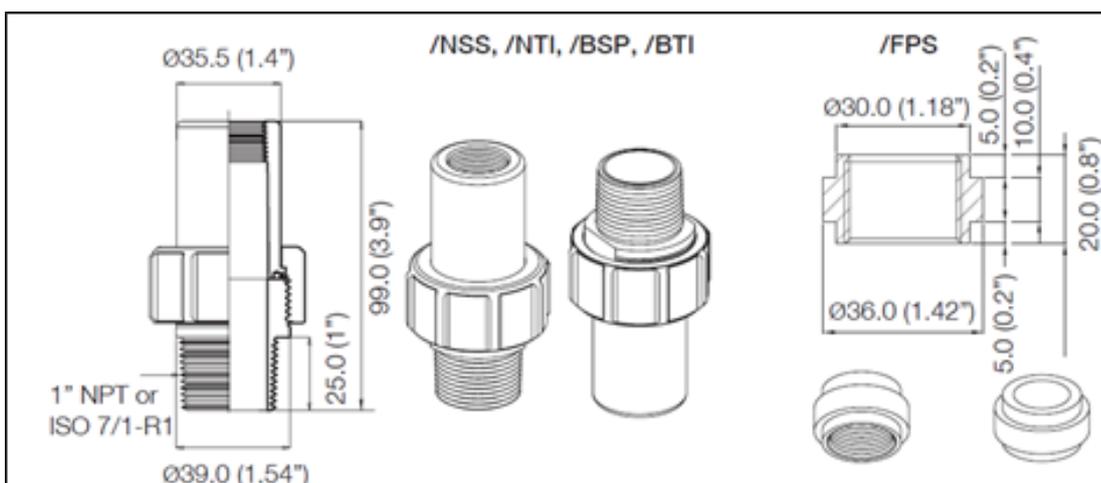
Dimensions 1" FU20 adapter Stainless Steel & Titanium and FU20 adapter for FF40, FS40 and FD40 fittings
